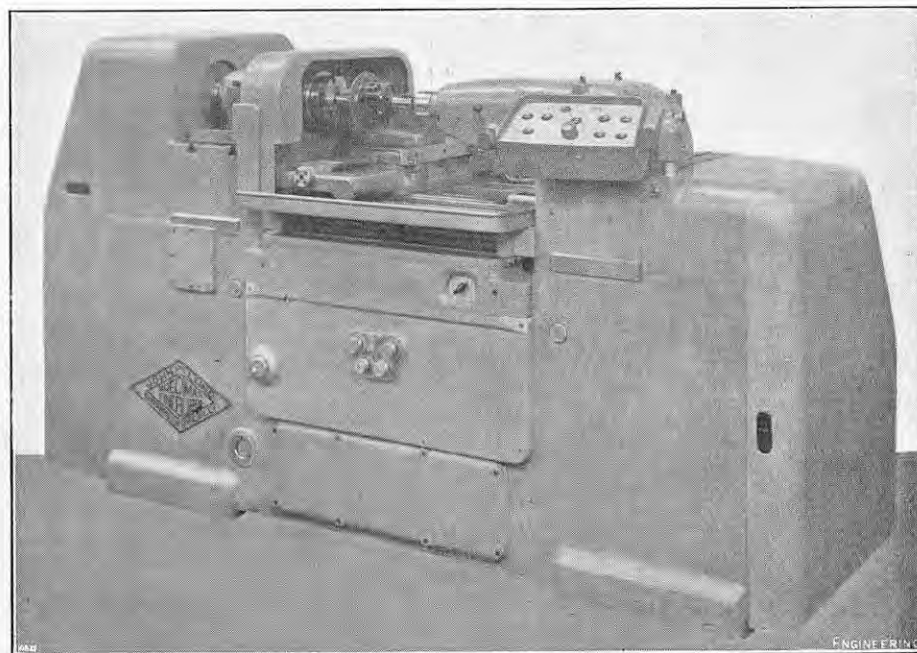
DOUBLE-ENDED FINE-BORING MACHINE; JOHN LUND, LTD.
